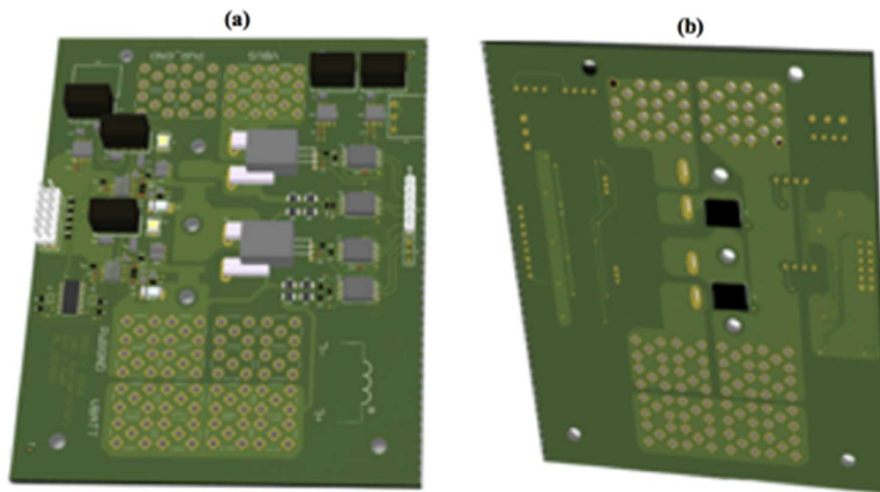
3D PCB board (Altium): top side (a) and bottom side (b)
